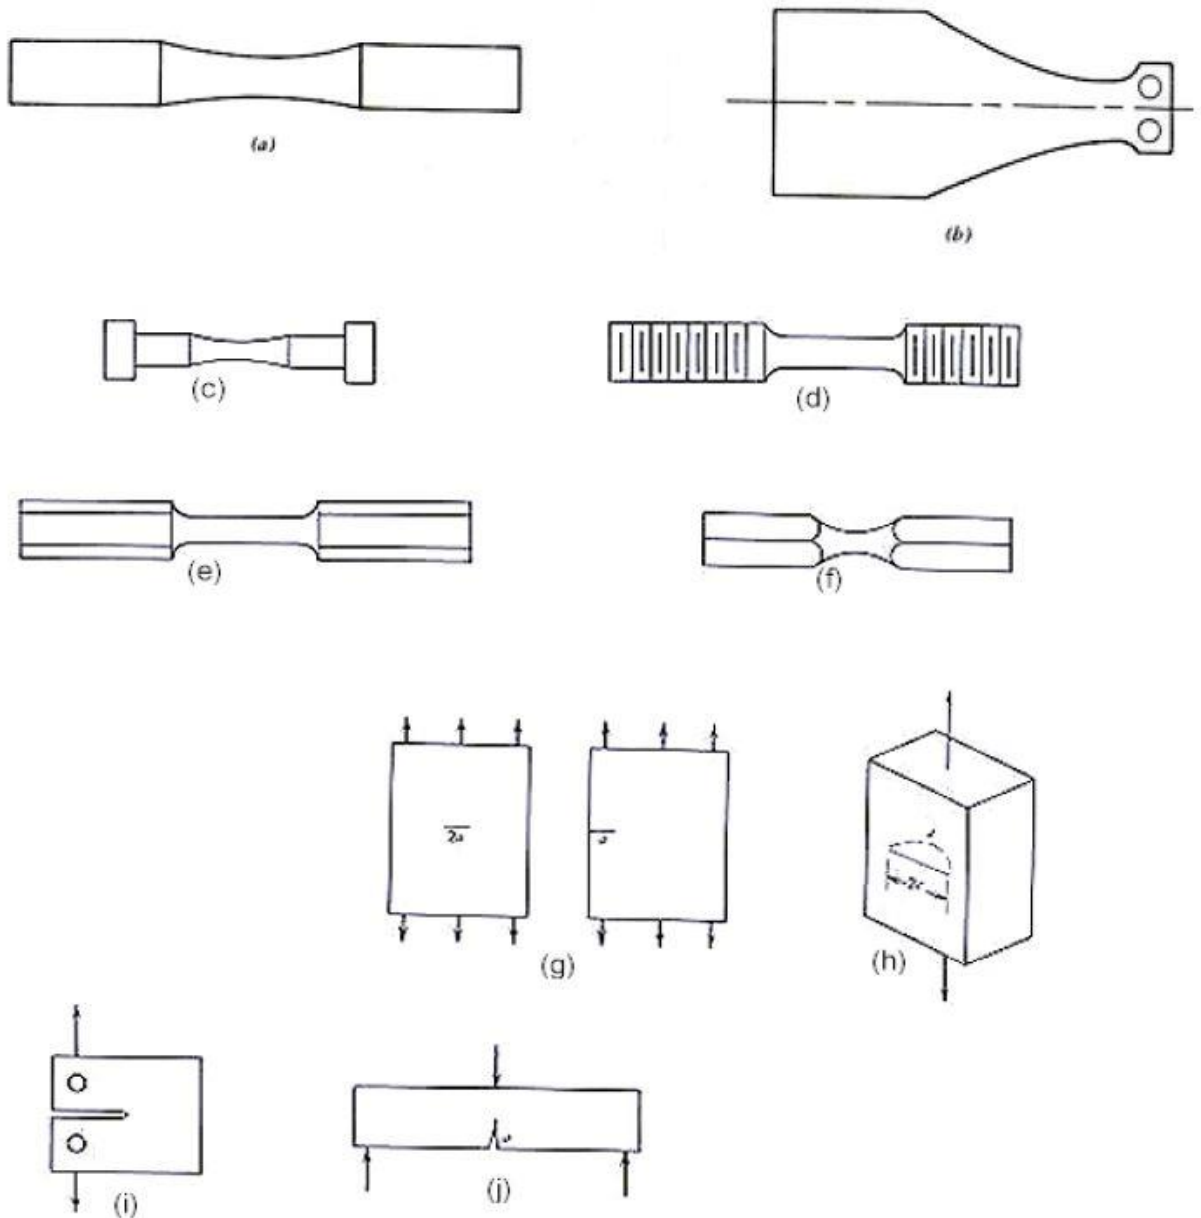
Fatigue Test Specimens: (a) Rotating Bending, (b) Cantilever Flat Sheet (c) buttoned axial dog-bone, (d) threaded axial dog-bone, (e) torsion, (f) combined stress, (g) axial Cracked sheet, (h) part-through crack, (i) Compact tension and (j) three point bend specimen [Fuch & Stephens, 1980].
